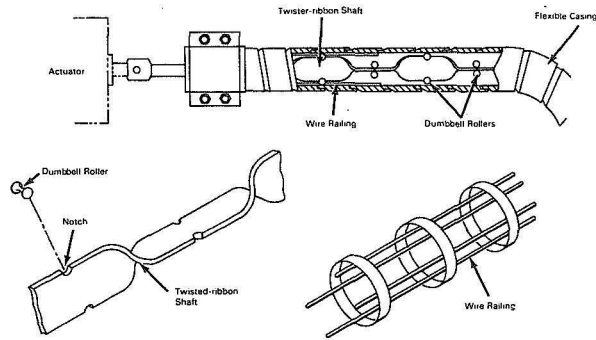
NASA-Developed Improved Mechanical Remote Control Assembly
